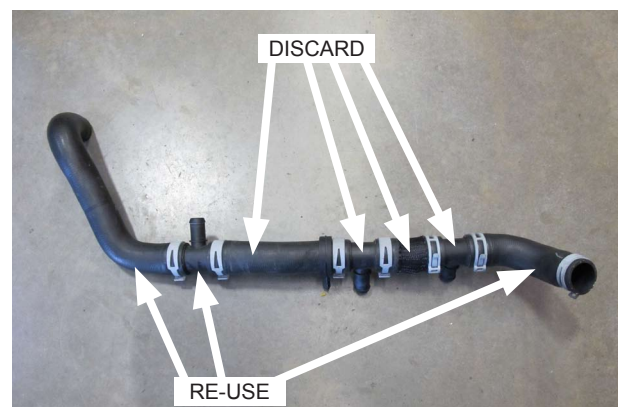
c: Disassemble Lower Radiator Hose Assembly
